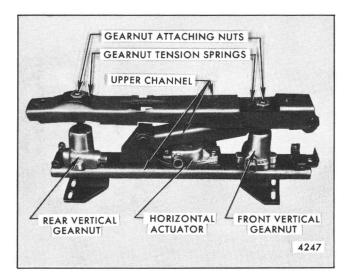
Six-Way Seat Adjuster - "B, C and E" Styles
